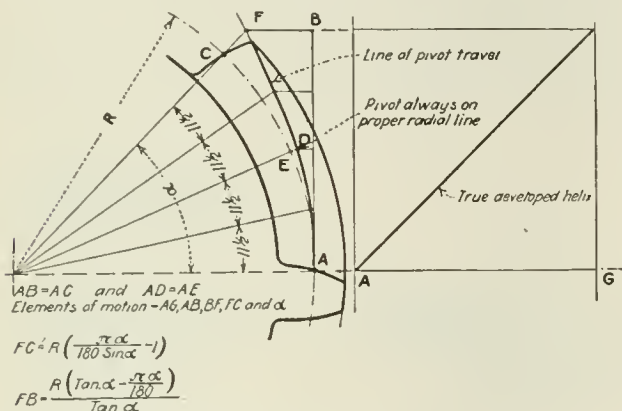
DIAGRAM SHOWING HOW HELICAL MOTION OF CUTTING TOOL IN THE HERRINGBONE-GEAR PLANNER IS OBTAINED
